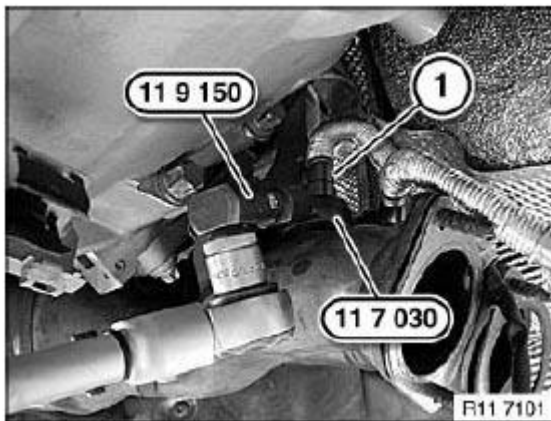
Identifying Monitor Sensor And Special Tools (11 7 030, 11 9 150)
